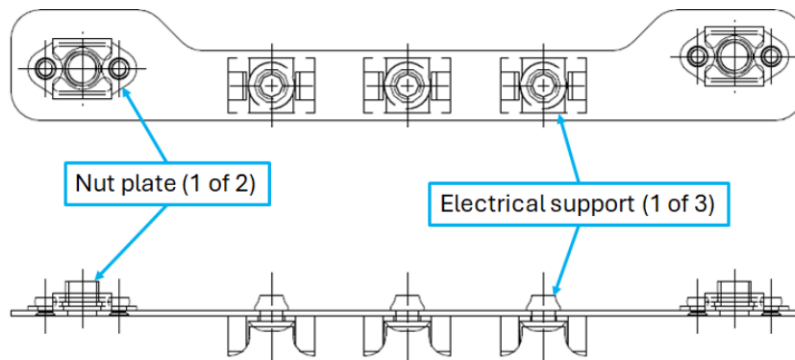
The two views of the right strip assembly in its manufacturing job card. (Courtesy of Leonardo Helicopters, modified by NTSB)
